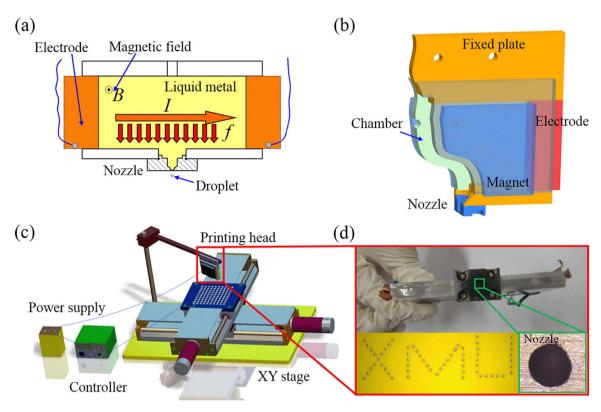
(a) Schematic of the electromagnetic printing. (b) The structure of print head. (c) Diagrammatic drawing of the electromagnetic printing system. (d) Photography of the print head and the nozzle. The bottom left shows characters "XMU" printed using this setup.
